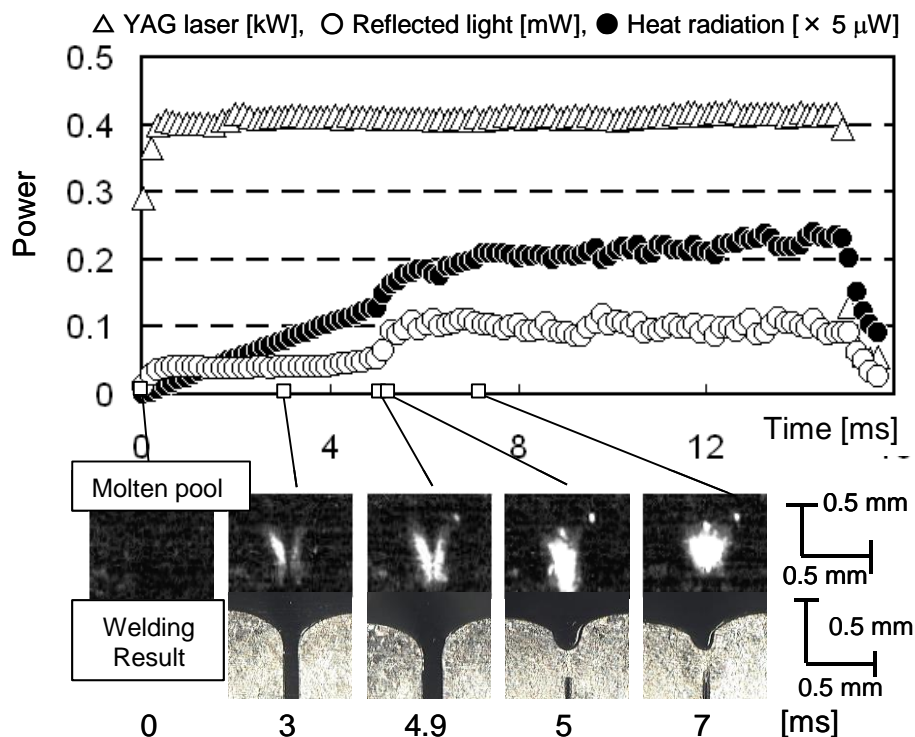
Features of pulsed YAG laser butt welding results produced in Ti sheets with gaps.
